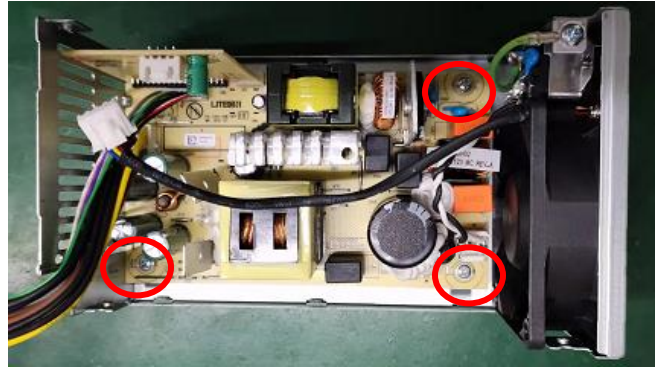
Cut output cable, AC inlet wire, LED wire. There are tw PCA with a surface greater than 10 sq cm on PSU.
